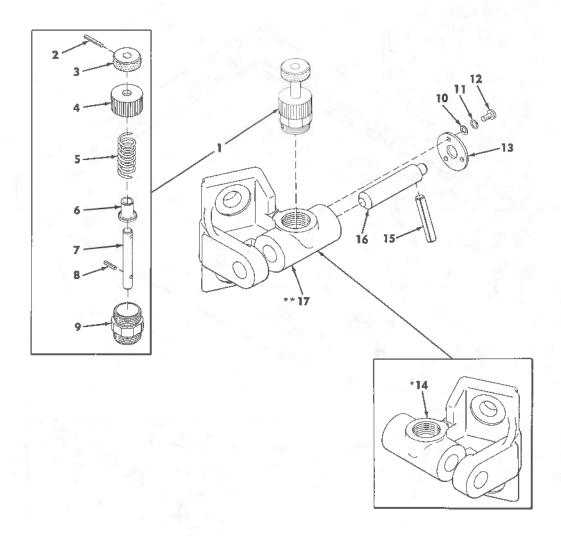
FRAME /8174372/-EXPLODED VIEW /SEE FIGURE 230 FOR NEXT HIGHER ASSEMBLY/
